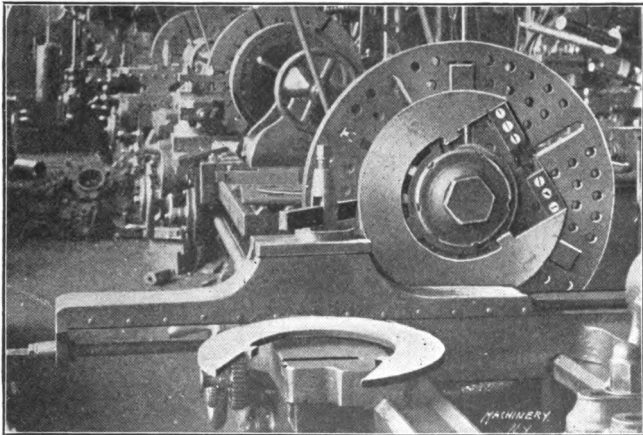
Facing the Bronze Liners for the Hub Bearing, on a Faceplate provided with Special Jaws
